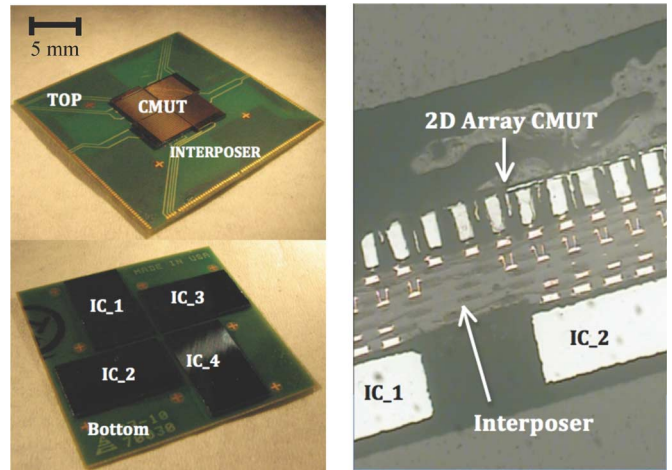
Tiled CMUT array with ICs integrated with an interposer board (Assembly A). Cross-sectional view is shown on the right.
